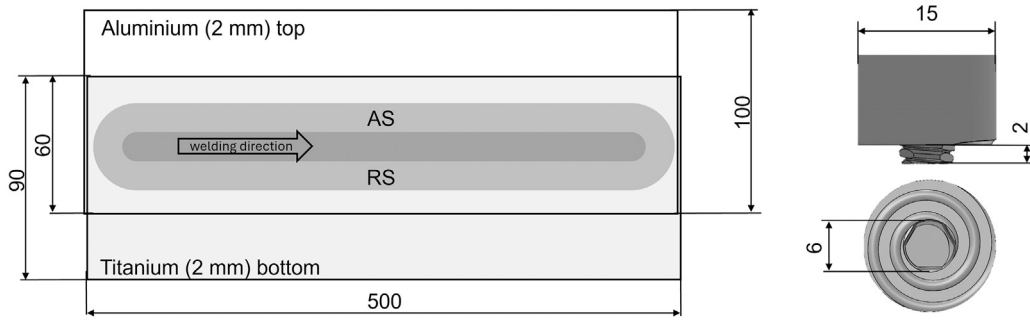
Dimensions of welding setup showing overlap, welding direction, advancing side (AS) and retreating side (RS) as well as the FSW tool geometry. All dimensions in mm.
